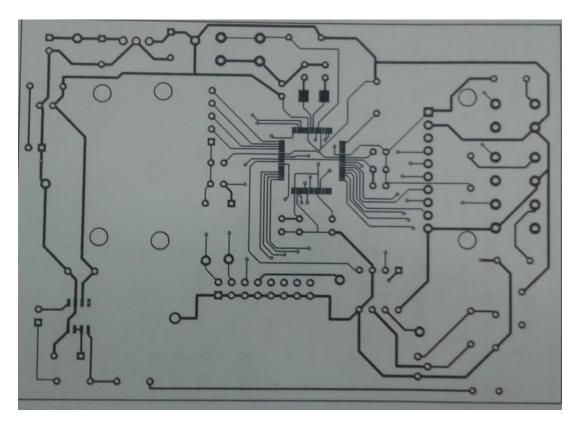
Top Copper ONLY layout of our PCB board. This can be used for grading
